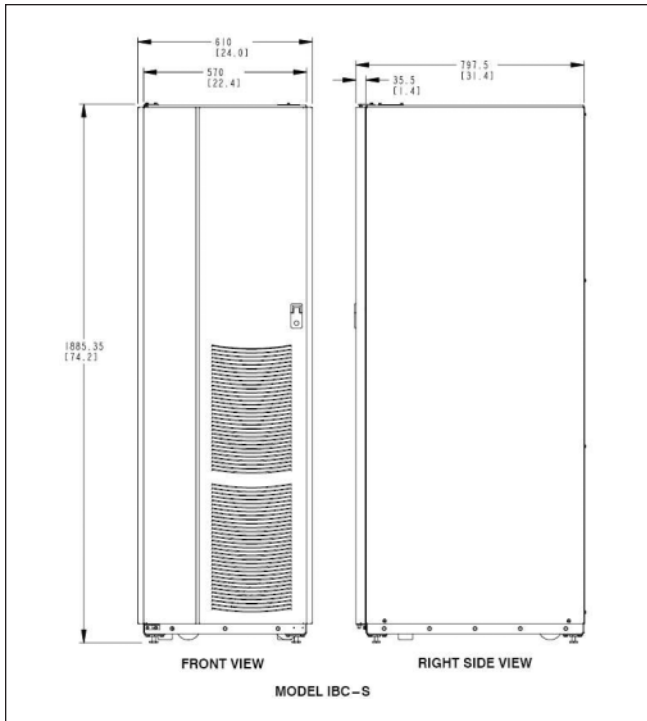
9390 IBC-S Battery Cabinet Dimensions
